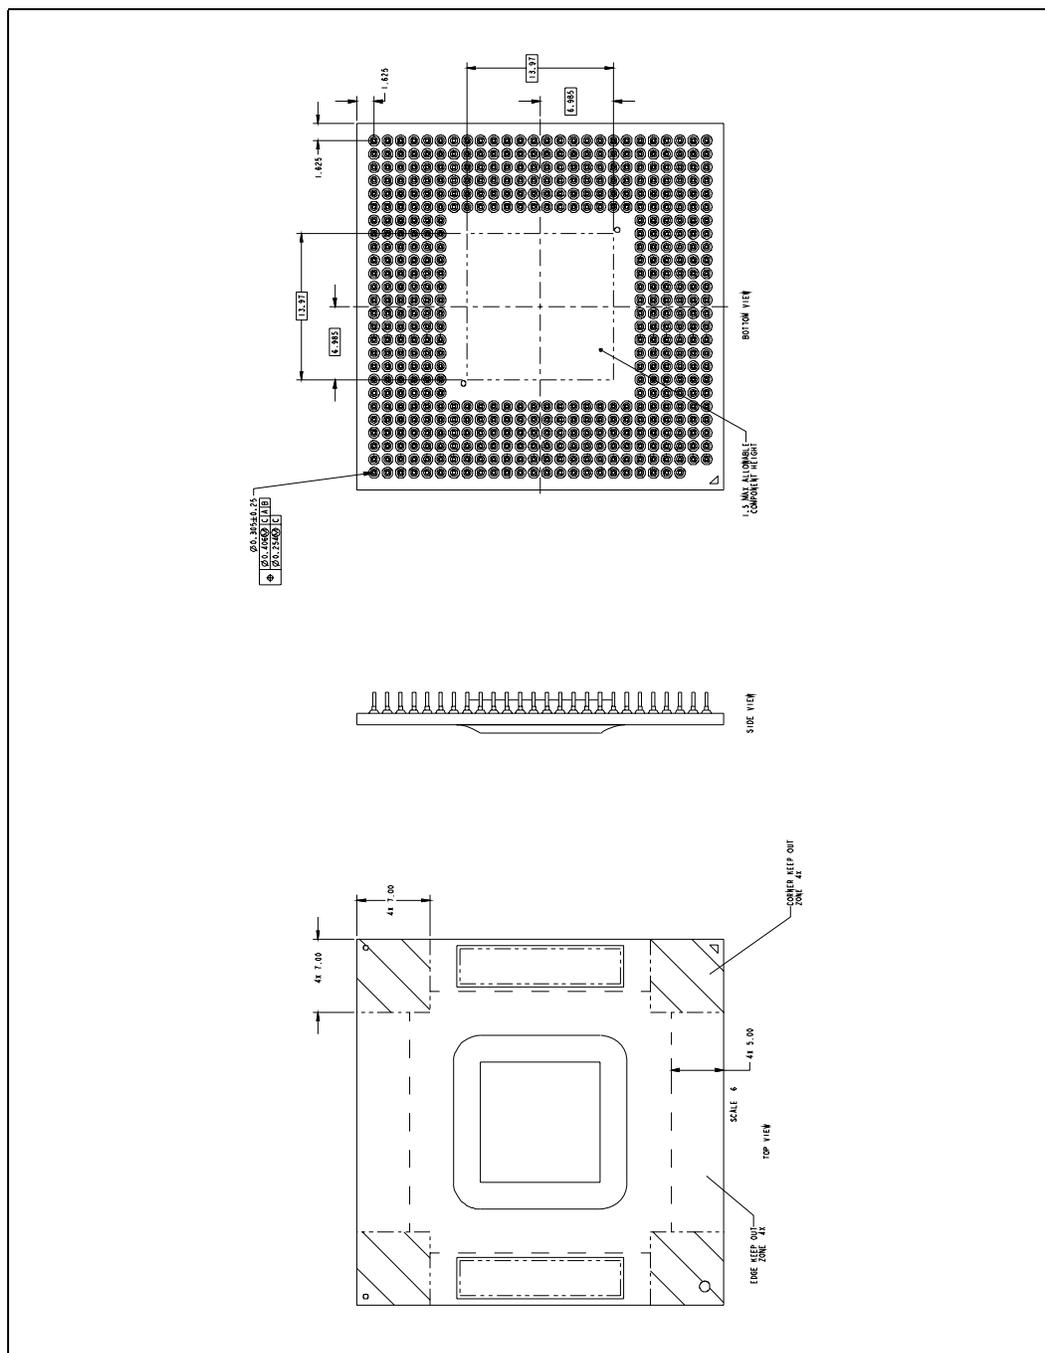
Micro-FCPGA Processor Package Drawing (Sheet 1)
